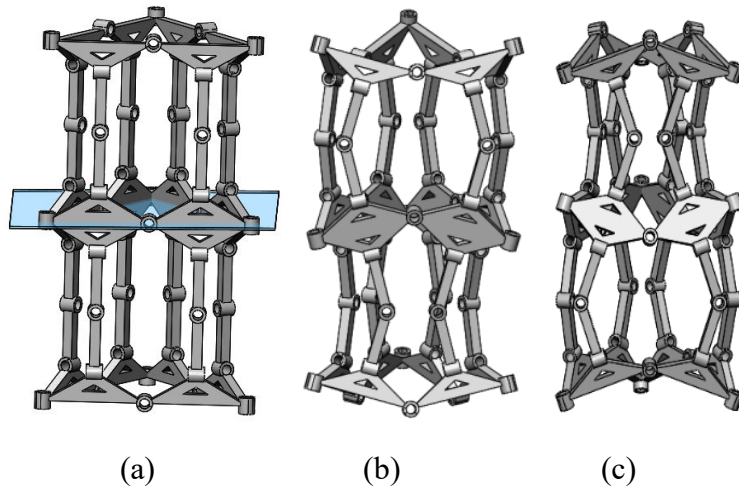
Double-layer prism mechanism based on Bricard linkages: (a) initial posture; (b) outward deploying; (c) inward deploying
